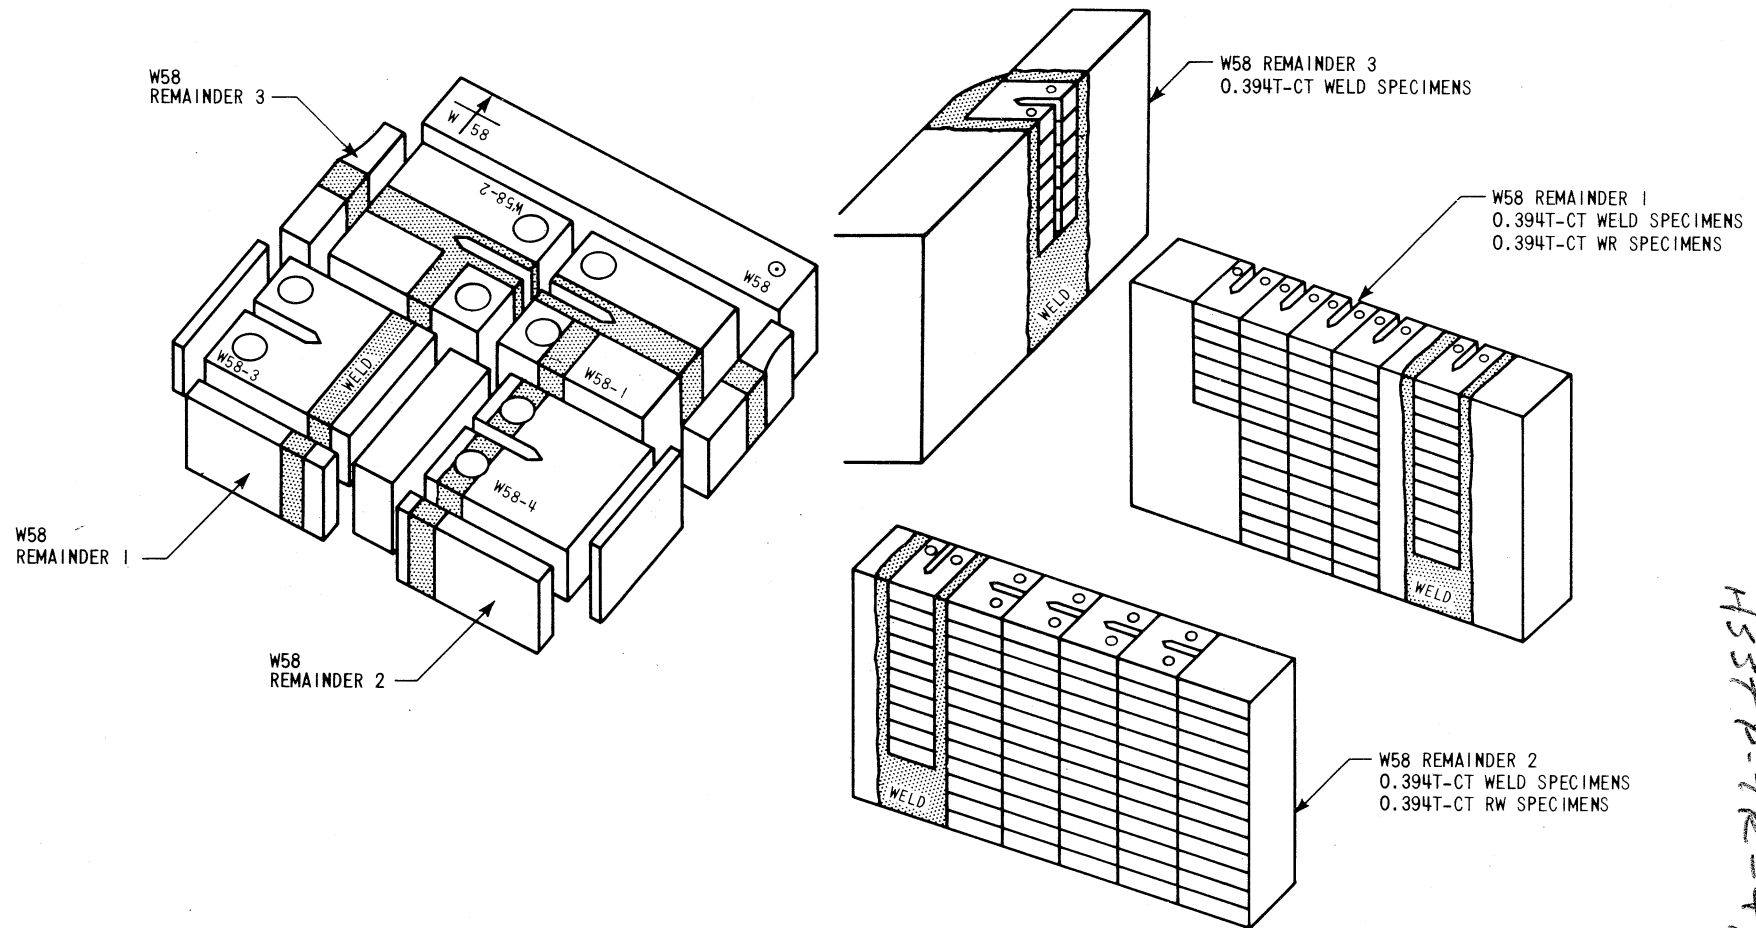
Location and Orientation of the RW and Weldment 4T-CT Specimens and the WR, RW, and Weldment 0.394T-CT Specimens.
